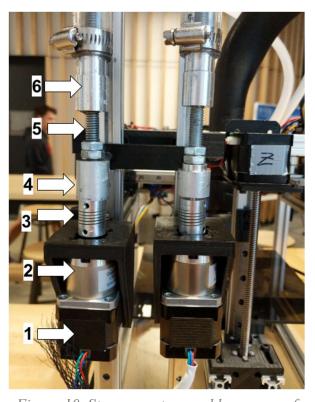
Stepper motors and lower cap of *pistons. In the photo the stepper motors (#1)* fitted with planetary gearboxes (#2) are shown mounted to their black carriers. This allows them to translate up and down the aluminum extrusions which serve as a frame for the extruder. Flexible disc couplings (#3) are used to transmit torque from the stepper motors to the threaded rods while allowing for angular and axial misalignment. An adapter (#4) is used to fix the threaded rod (#5) to the flexible disc coupling. The lower caps (#6) of the cylinders are threaded so that the threaded rod and motors will advance when the threaded rod is turned. As the threaded rod turns, the pistons are advanced through the cylinder.
